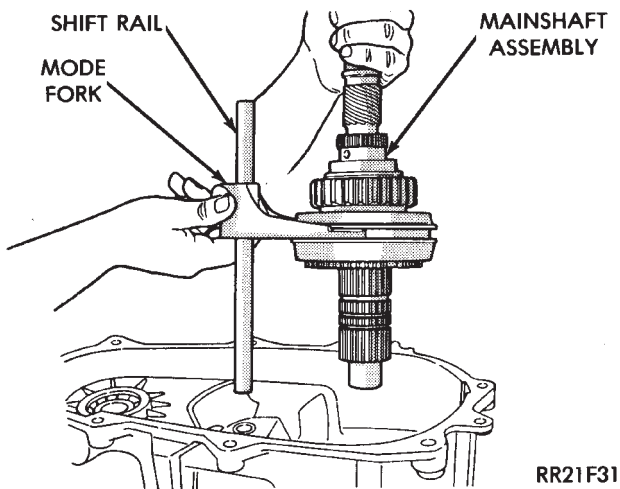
Removing Mainshaft, Mode Fork And Shift Rail
